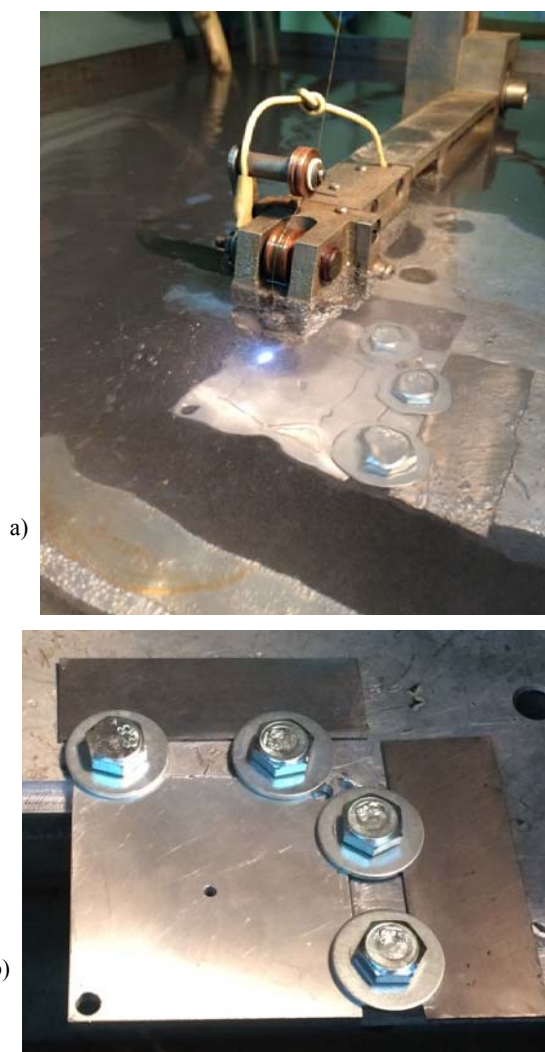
a) Basing and tightening of the workpiece in auxiliary equipment, b) processing of the EDM with a wire.
